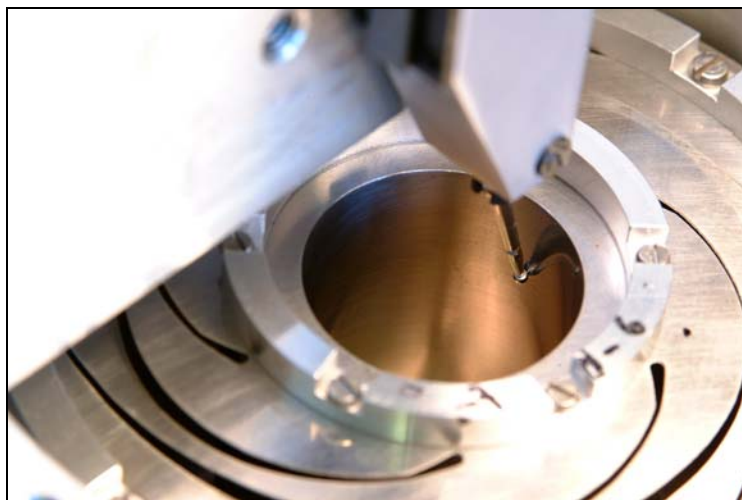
Instron Test Assembly for Measuring Run-out.
